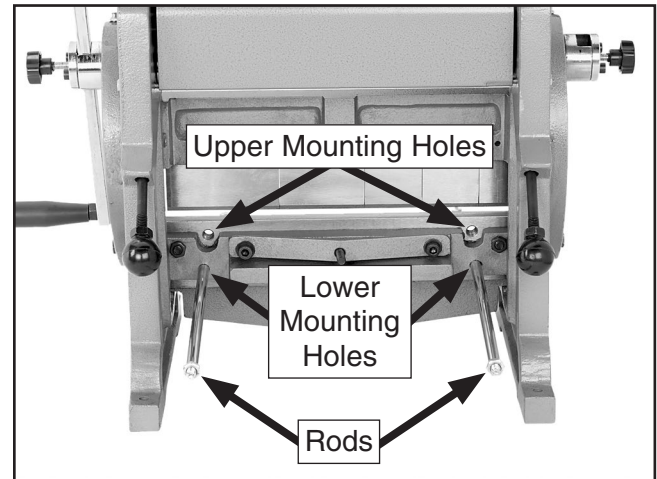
Work stop rods mounted in the lower holes for use with the shear.
